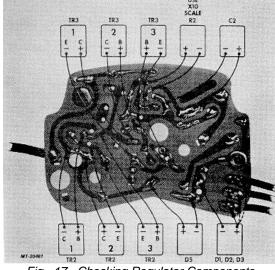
Checking Regulator Components (Regulator Shown in Figure 16)
